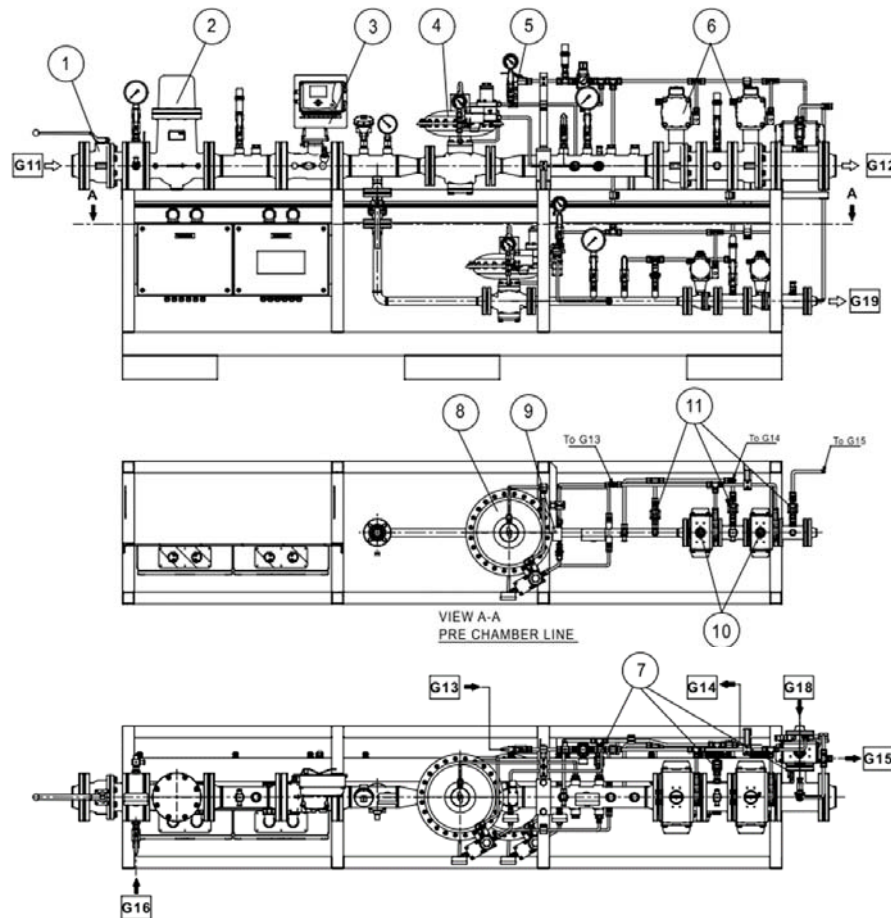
Typical drawing of OpenType Gas Regulating Unit
